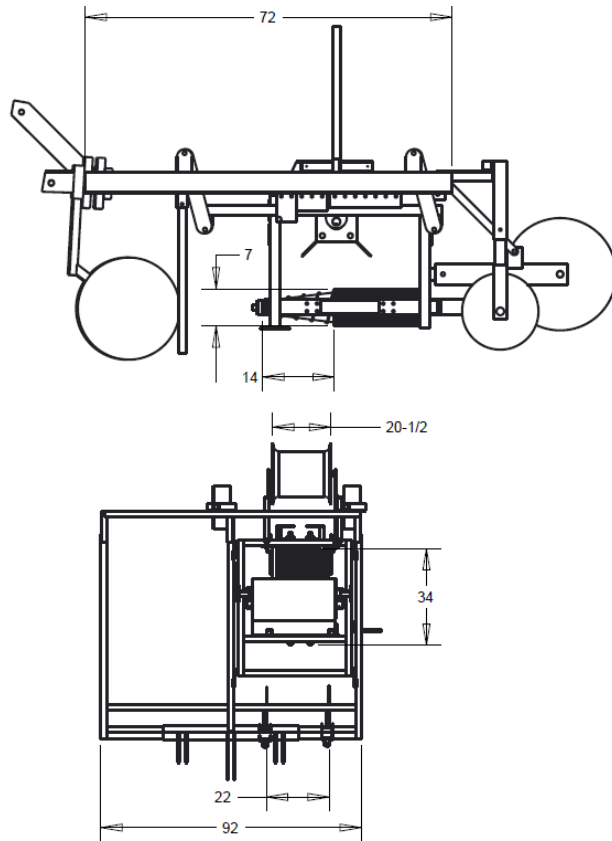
Drawing with basic dimensions (in inches) of the one-row prototype harvesting aid
